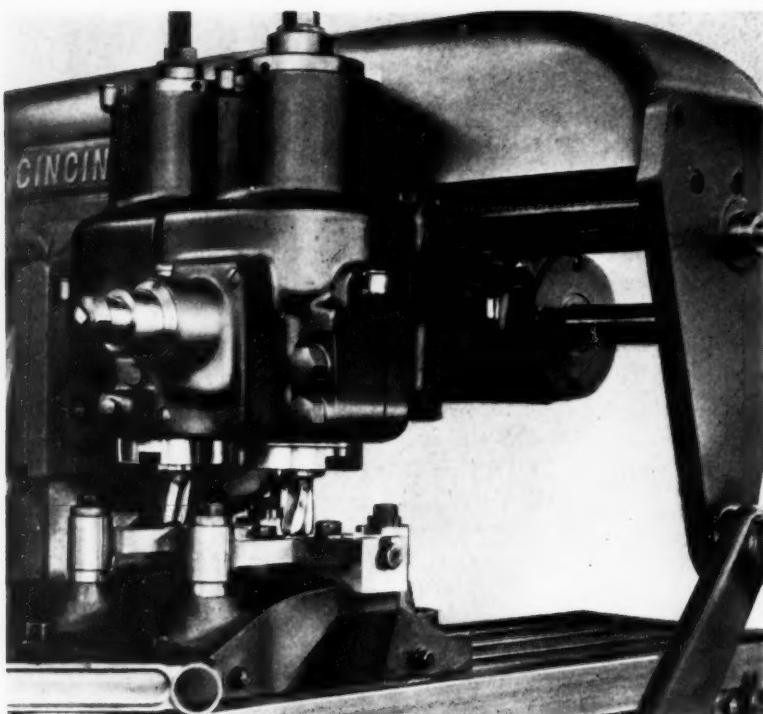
Milling the Channels in Baby Rods on a Standard Knee-and-column Type Milling Machine
